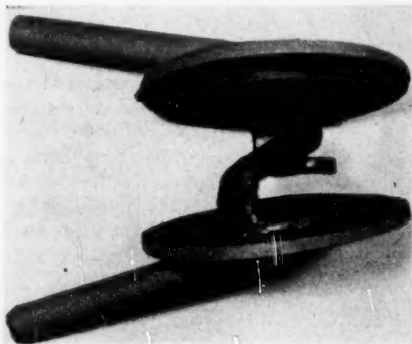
These flanged protectors feature locking hooks which permit them to be interlocked with a twist of the wrist for insertion in a hole, as shown in the part in Fig. 1.
